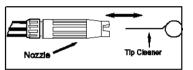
Insert tip cleaner in nozzle hole and move back and forth until debris is dislodged
